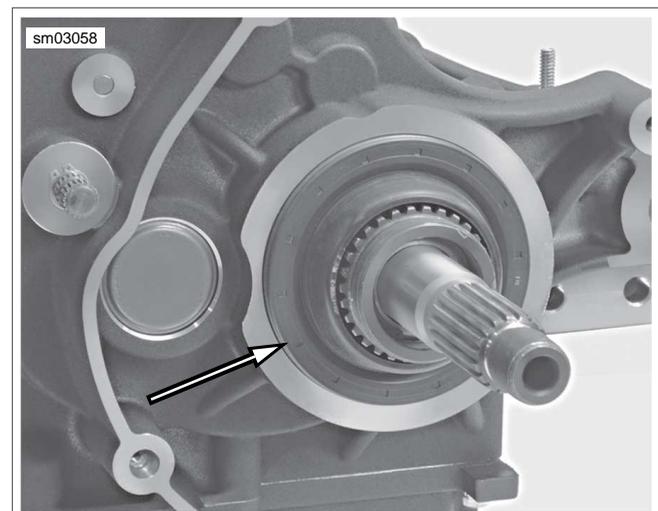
Place Main Drive Gear Seal Over Pilot
